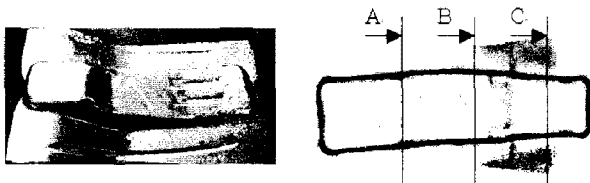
(a) Draw panel and (b) Thickness measurement at section A, B & C
